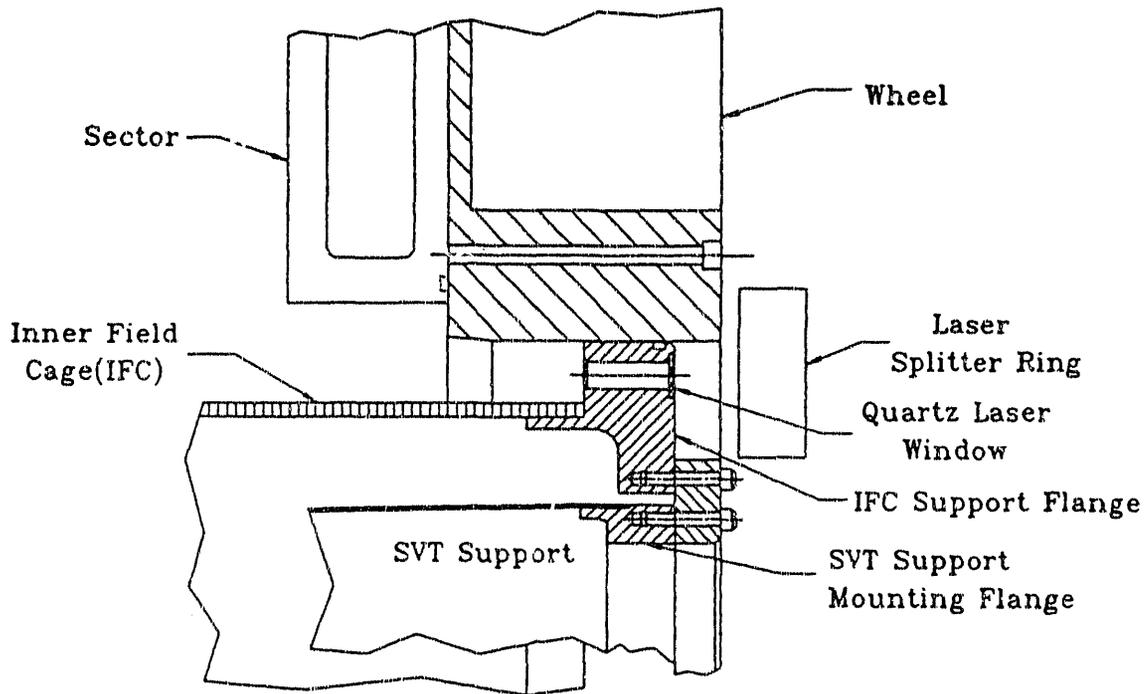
C-33 Inner field cage and SVT support mounting to the end-cap wheel (east end).
